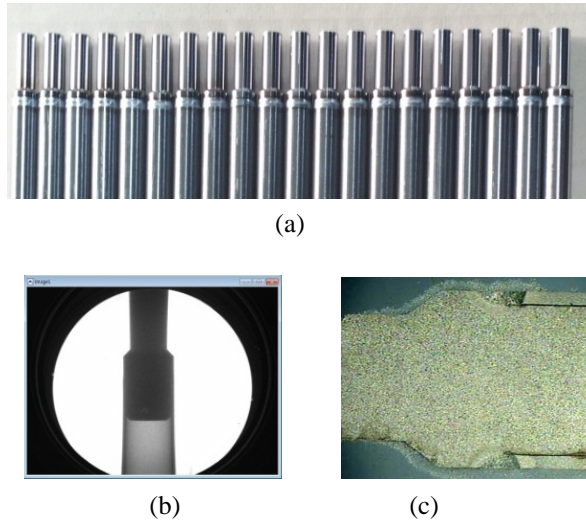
(a) Fuel rods welded by GTAW, (b) X-ray radiography result on the weld part, and (c) metallographic examination on the weld part.
